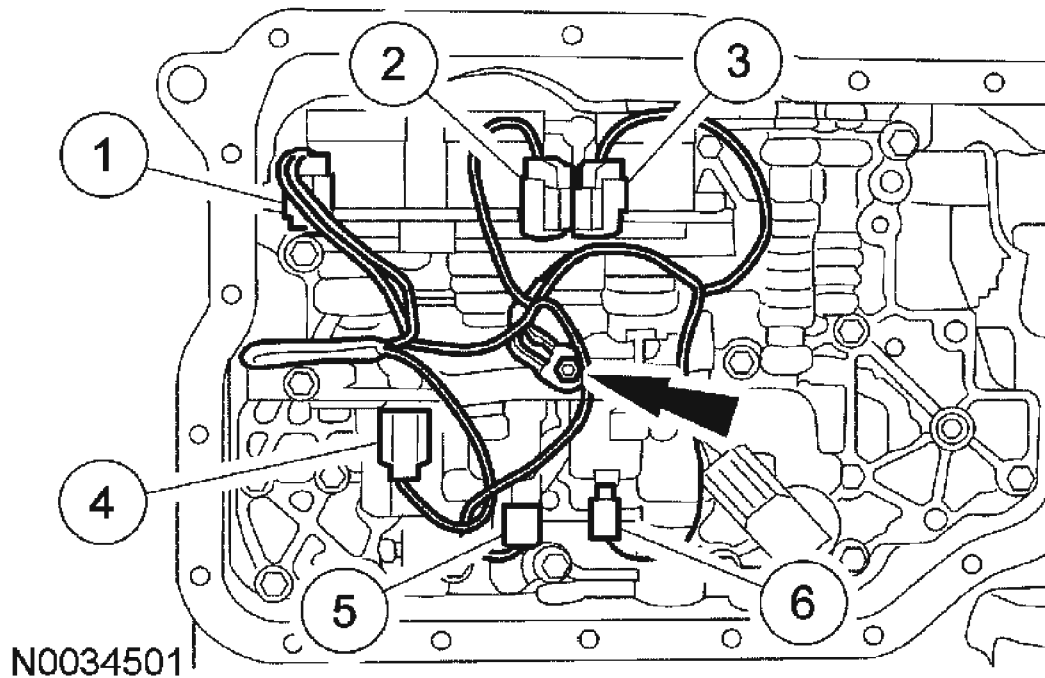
Installing Main Control Valve Wiring Harness, Connecting Electrical Connectors And Installing Ground Wire Bolt
